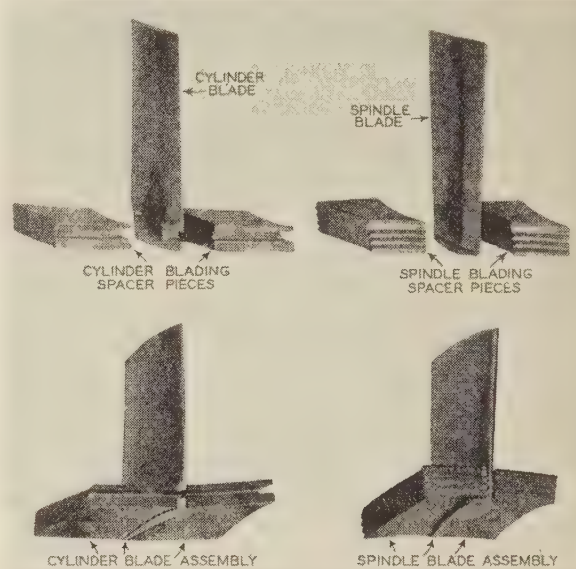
CYLINDER AND SPINDLE BLADING FOR THE AXIAL COMPRESSOR
